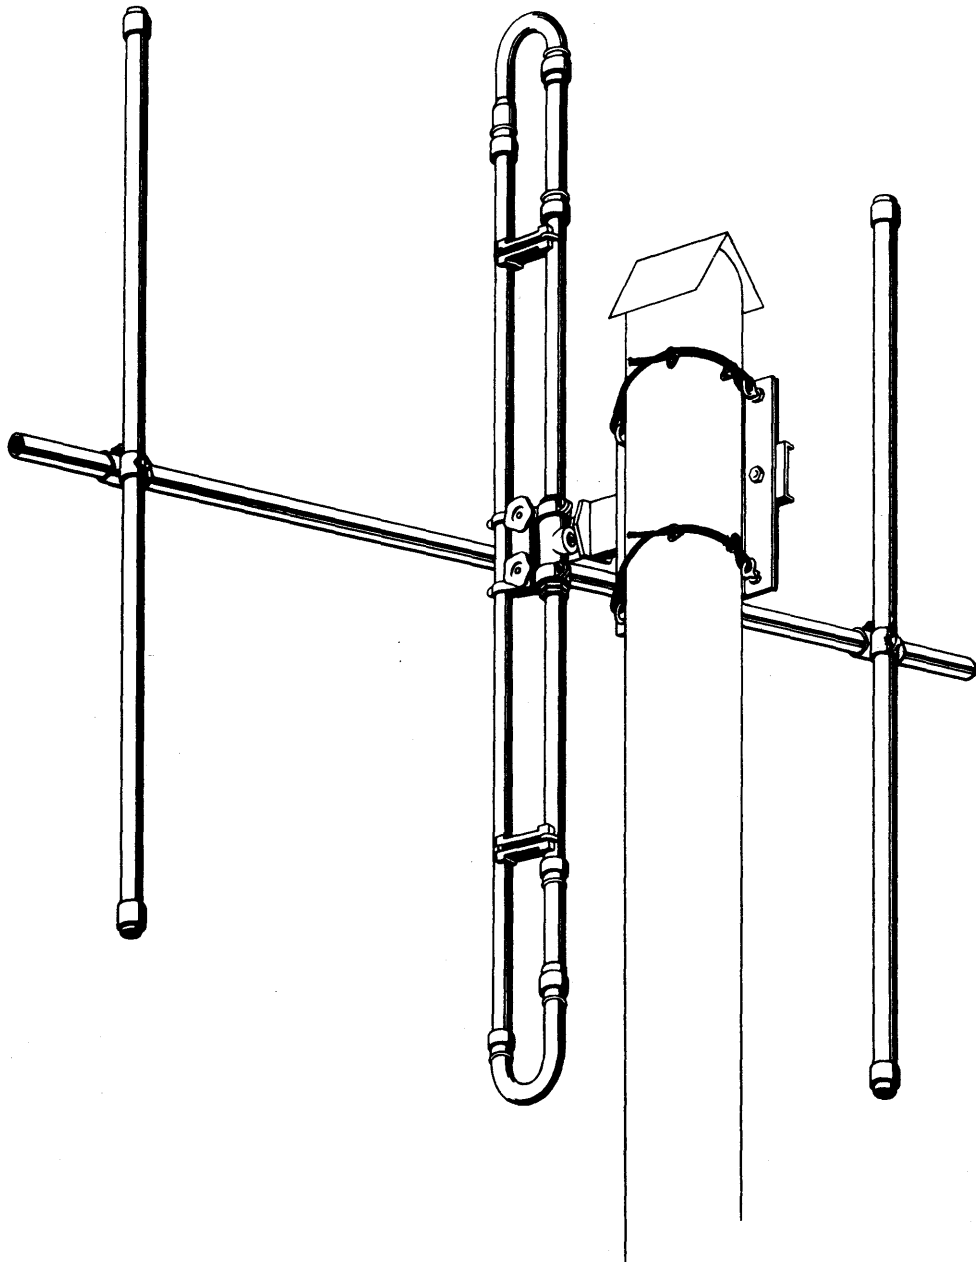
FIG. II. FITTING SUPPORT ASSEMBLY TO TELEGRAPH POLE.
